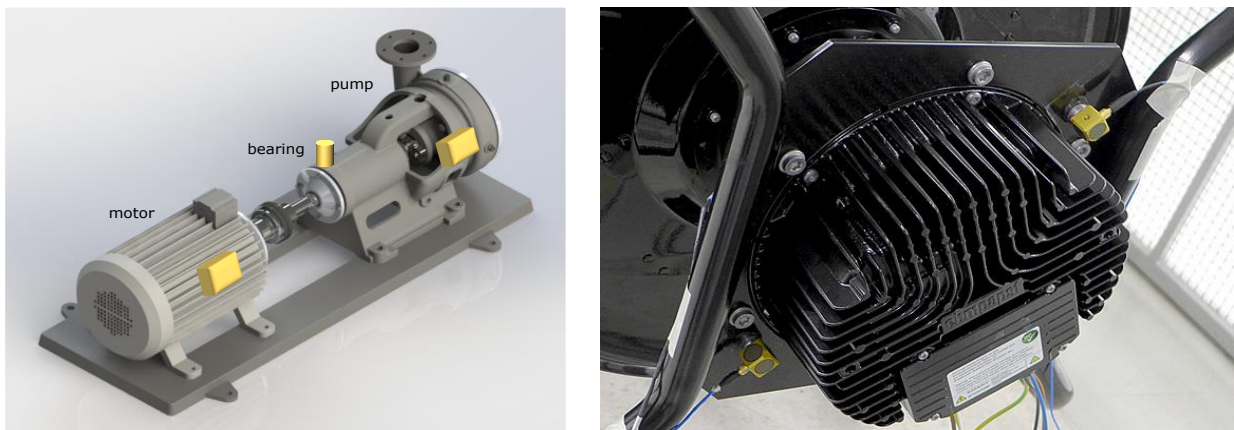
Examples of industrial smart sensors (yellow) attached to electric motors.⁸⁴³
